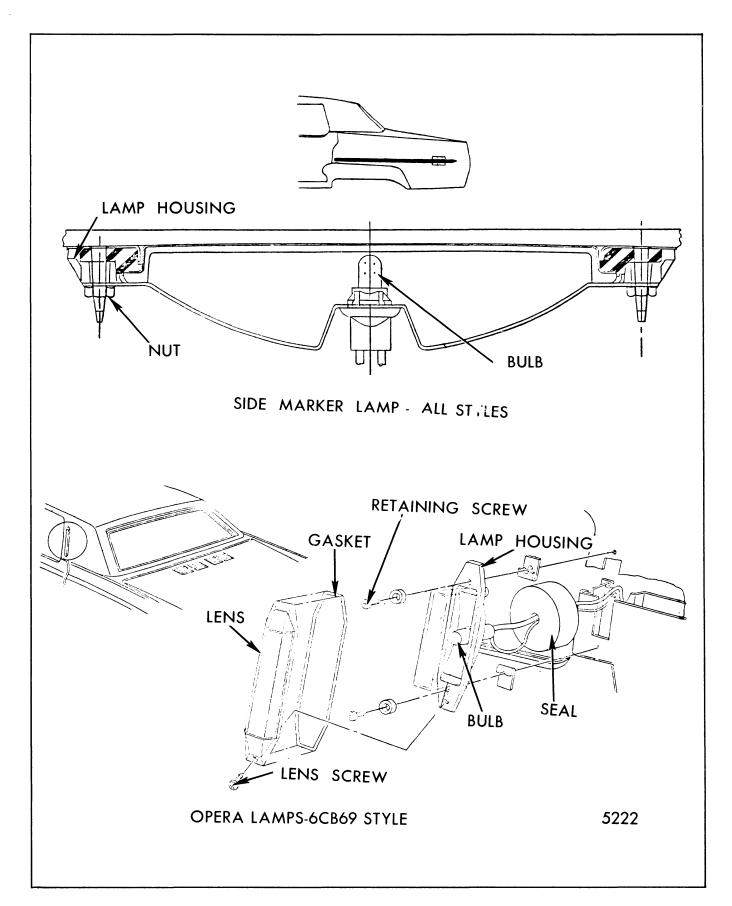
Exterior Lamp Installation - Cadillac Styles
